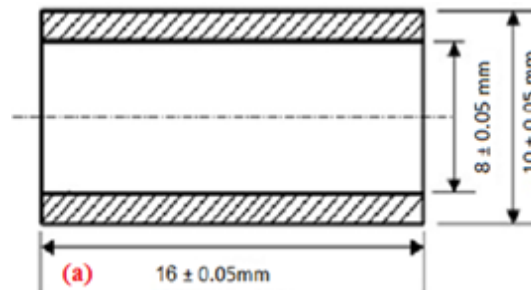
1 Al, Br, Ms work piece used in trials and its dimensional details
